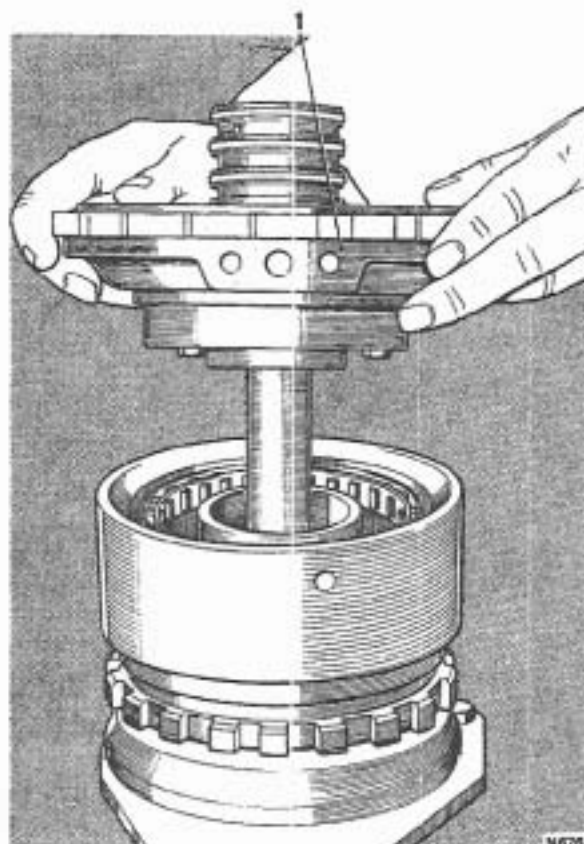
REMOVING THE CENTRE SUPPORT ASSEMBLY
